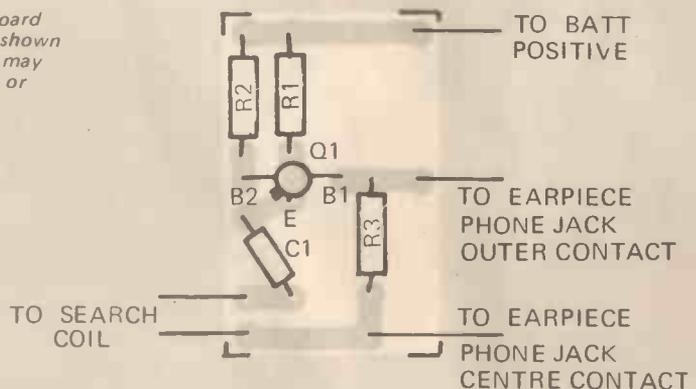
A printed circuit board may be used (foil pattern shown here full size), or the unit may be assembled on tag strips or Veroboard.
